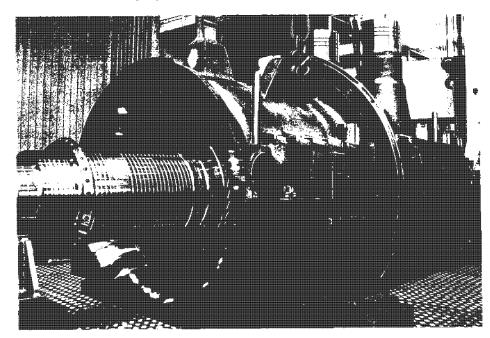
OLD INLET GLAND SHOWING HEAVY BOTTOM RUBS
